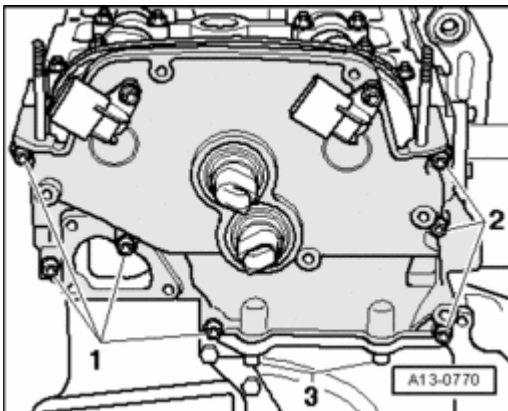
Installing Upper Cover For Camshaft Timing Chain And Tightening Bolts
